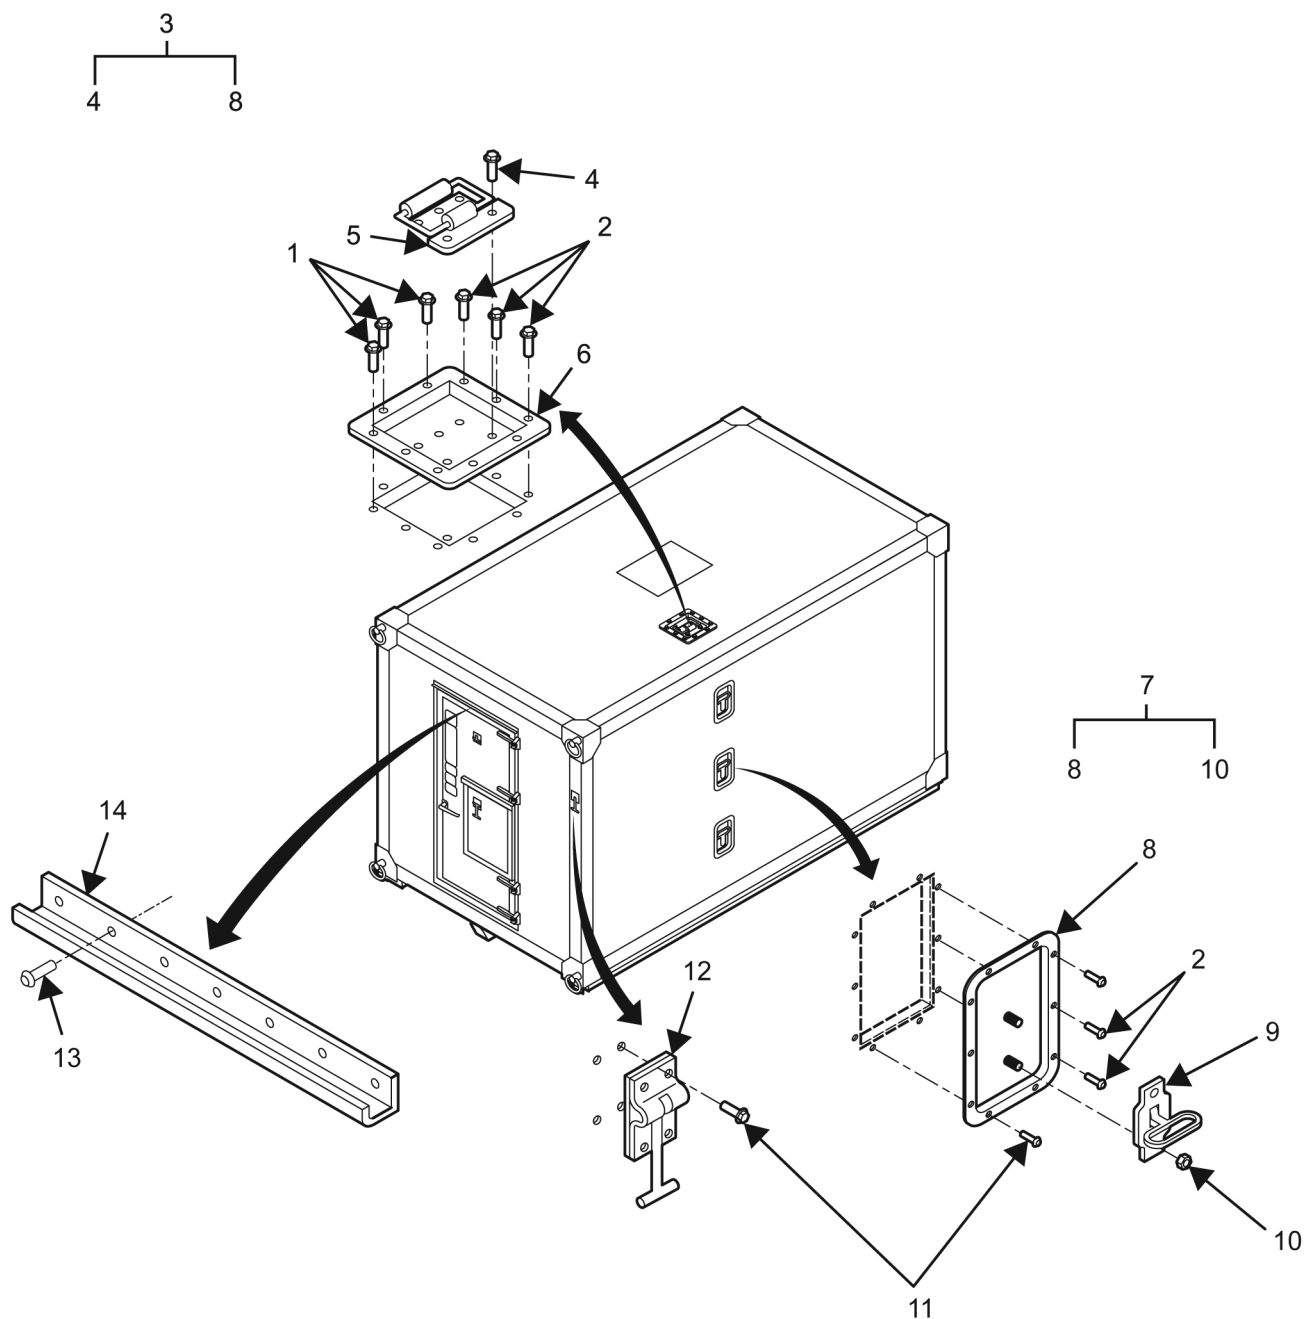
Shelter, Electrical Equipment S-280 (Sheet 1 of 3).
